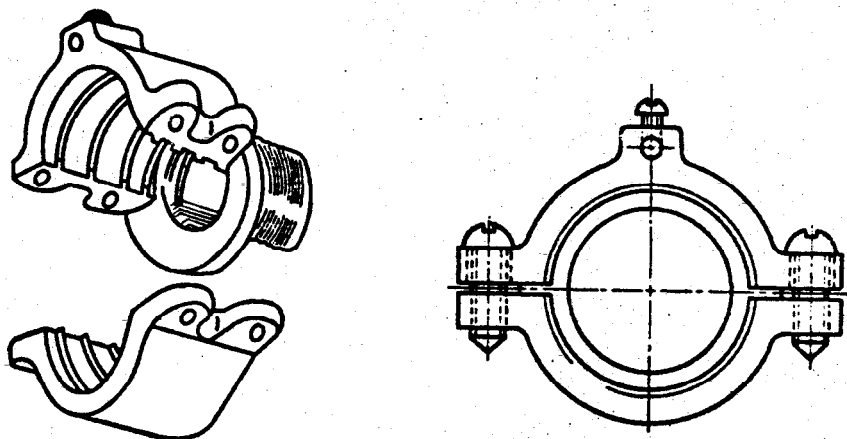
A TYPICAL EXAMPLE OF A CLAMP TYPE ADAPTOR WITH EXTERNAL EARTHING SCREW ( THREADED TYPE )
